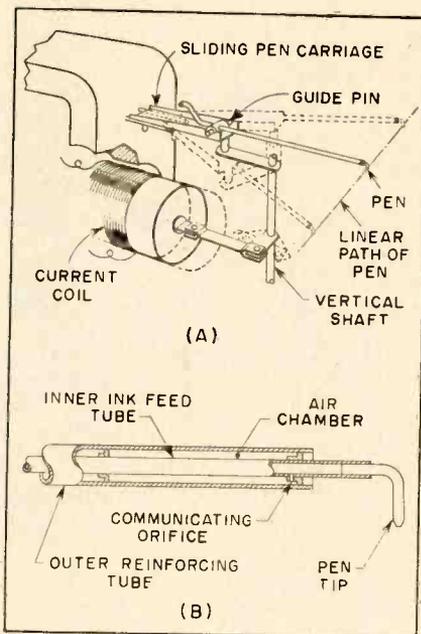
Pictorial view of mechanical linkage (A) and pen construction (B). Drive coil moves in and out horizontally like loudspeaker voice coil, to move pen through linkage
